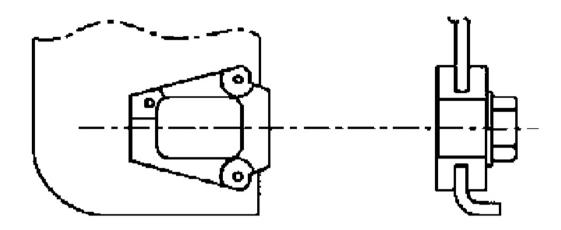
Inspecting Capsule On Steering Column Bracket Assembly Courtesy of GENERAL MOTORS CORP.
